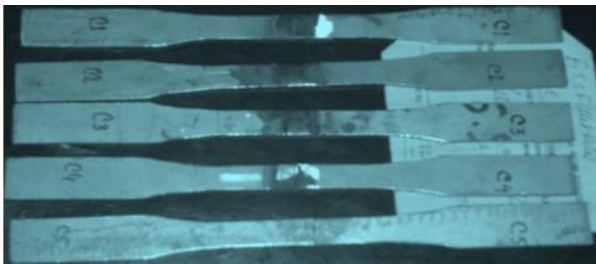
(c) MIG welding welded tensile specimens using ER430 filler metal.
